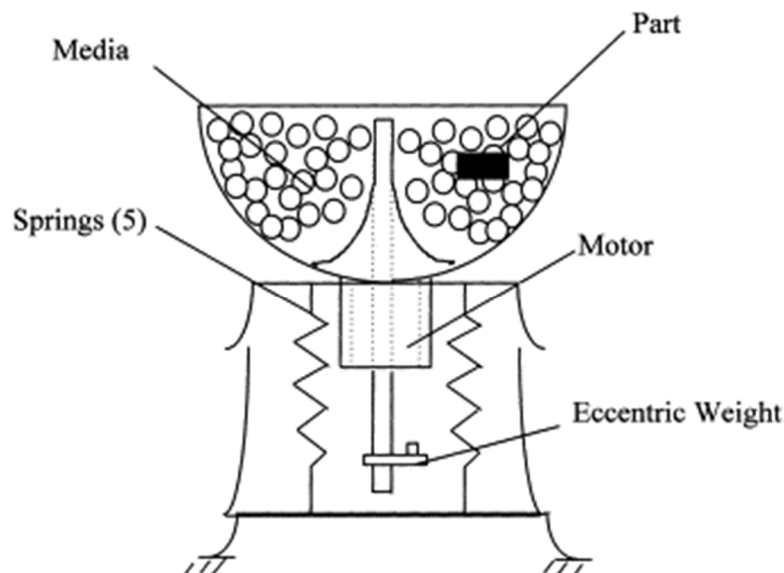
Main parts of the vibratory machine. *Source: paper "Experimental investigation of vibratory finishing of aluminium"
